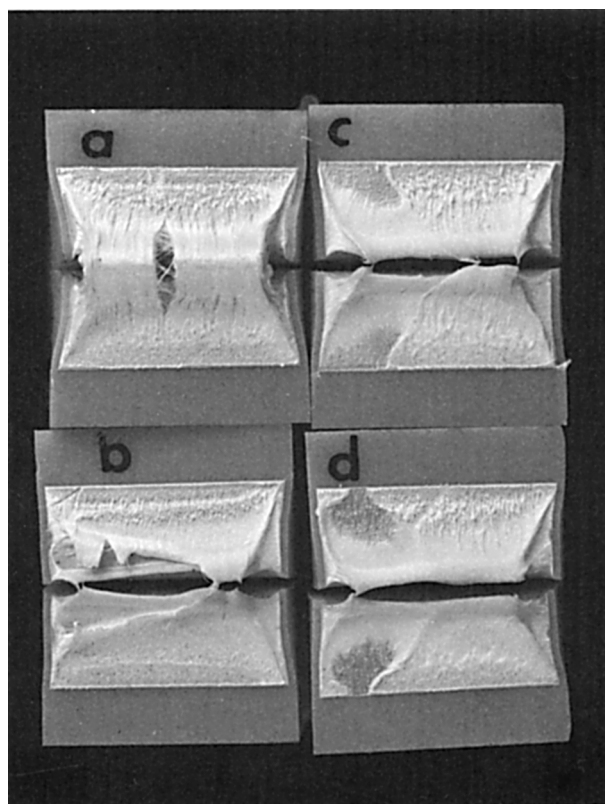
Fracture surface by optical microscopy: (a) pipe; (b) weld at 1.61 MPa; (c,d) weld at 0.31 MPa.
